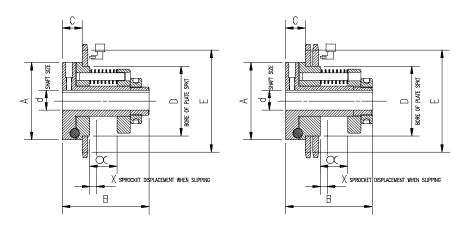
Mayfran safety clutch section view. See table below for dimensions.
